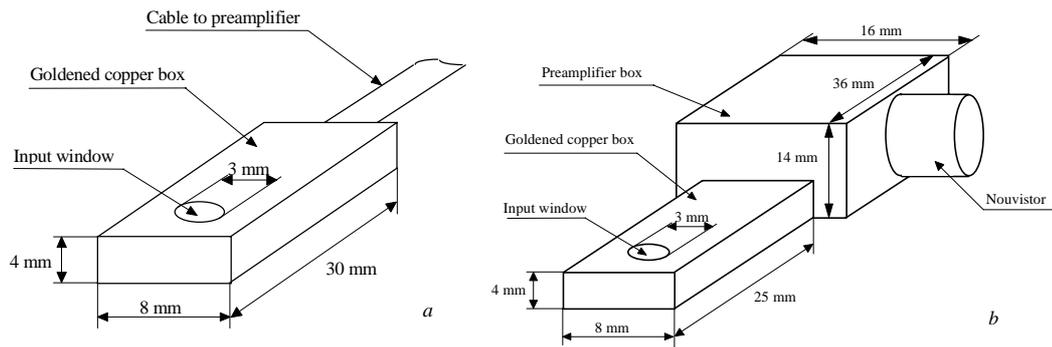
NDD casing design sketches: a - single NDD casing, b - NDD + preamplifier assembly.
